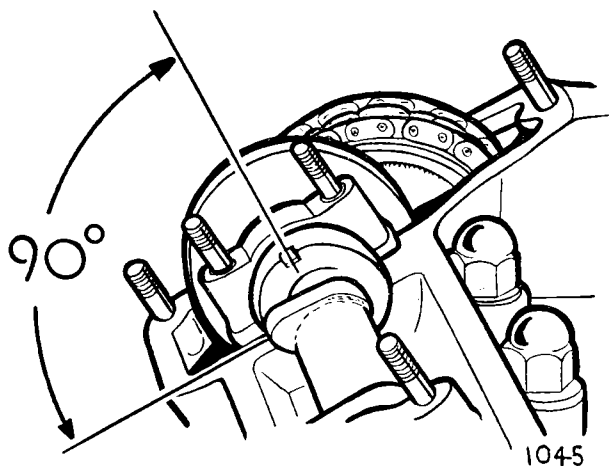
When fitting a camshaft the keyway must be at 90° to the camshaft cover face
